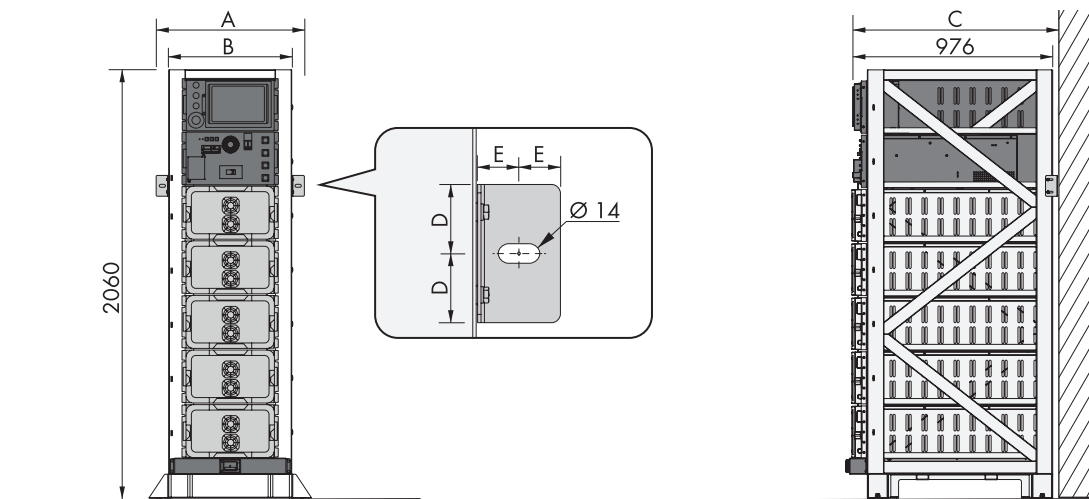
Installation dimensions for the indoor version of the battery cabinet (dimensions in mm)
